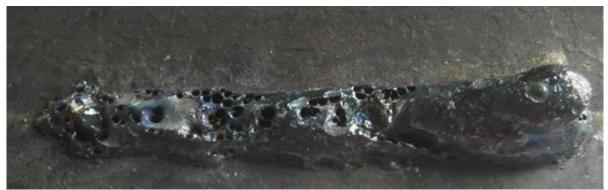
Quality of the weld surface with a 5–10 mm fraction used in welding
